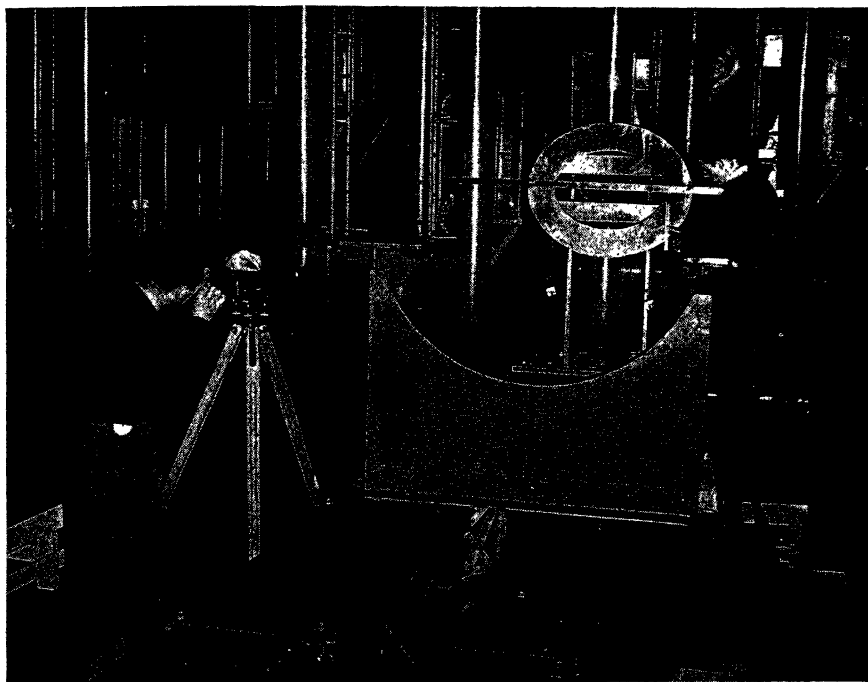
Leveling a fixture. A Y level manufactured by the Eugene Dietzgen Co. of Chicago being used to level an airplane fixture at the Hagerstown, Md., plant of the Fairchild Engine & Aircraft Corp. (*Eugene Dietzgen Co. and Fairchild Engine & Airplane Corp.*)
